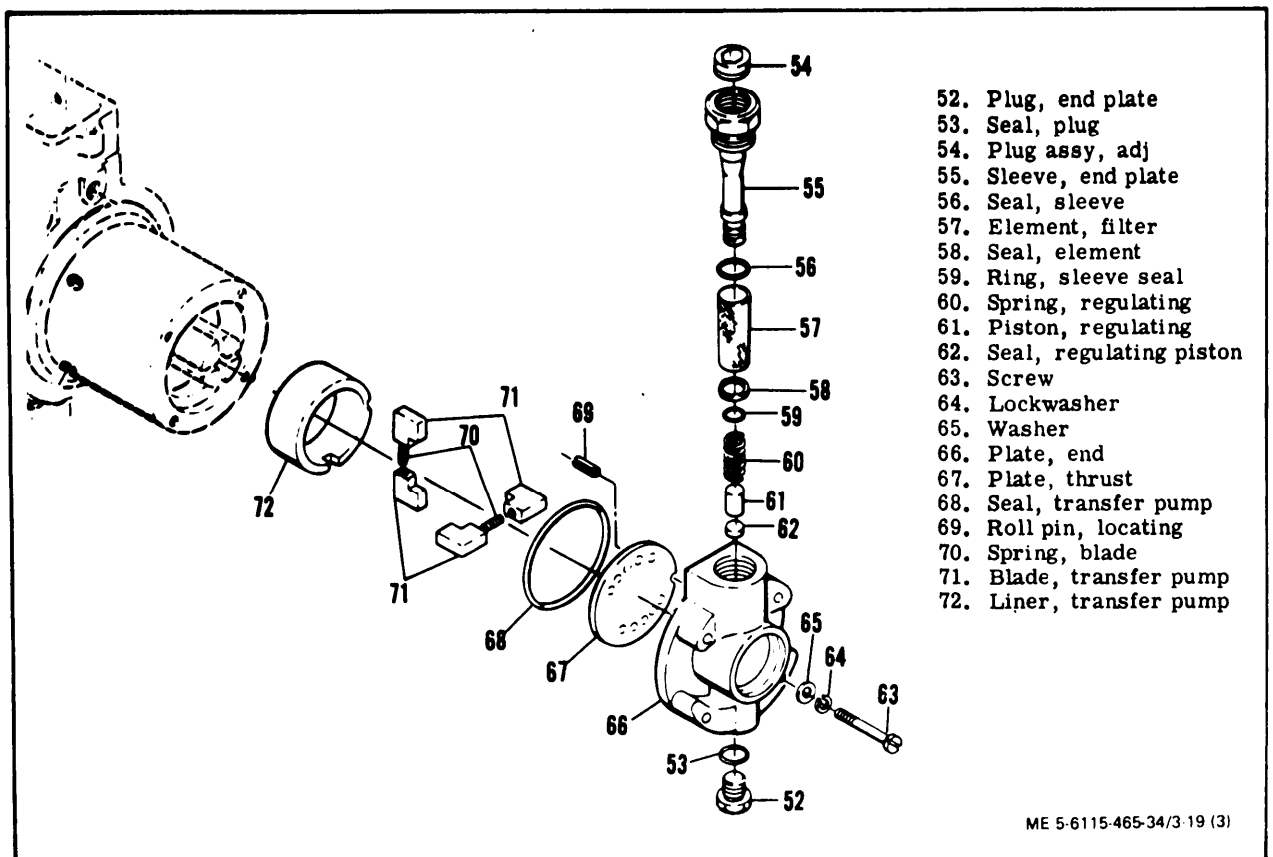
Fuel Injection Pump, Exploded View (Sheet 3 of 7)
